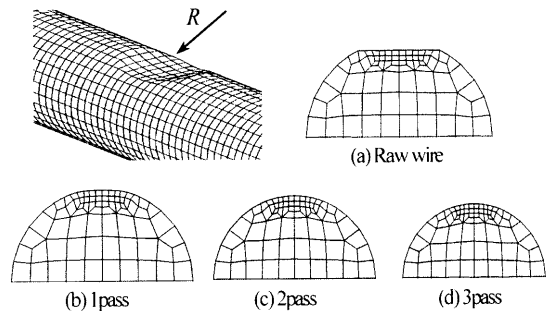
Cross-sectional recovery of a crack removal part by drawing.
